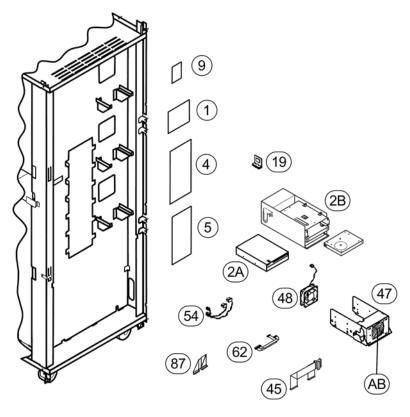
Exploded view for 3800ux/7100ux models (1 of 6)
